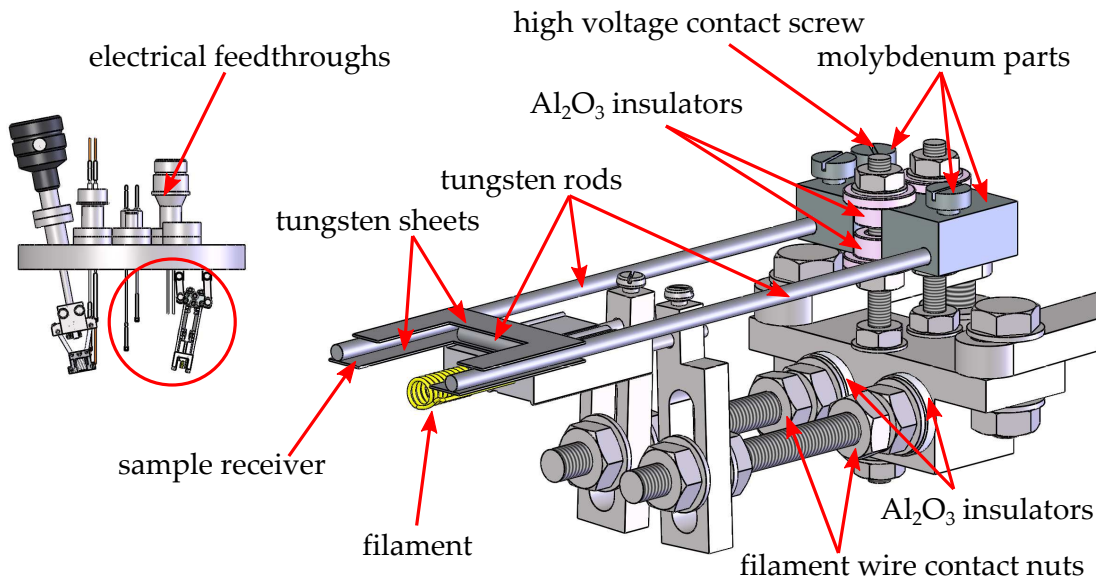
Left: top view of the flange assembly for the sample heaters. Right: Enlarged 3D model view of the electron beam heater.
